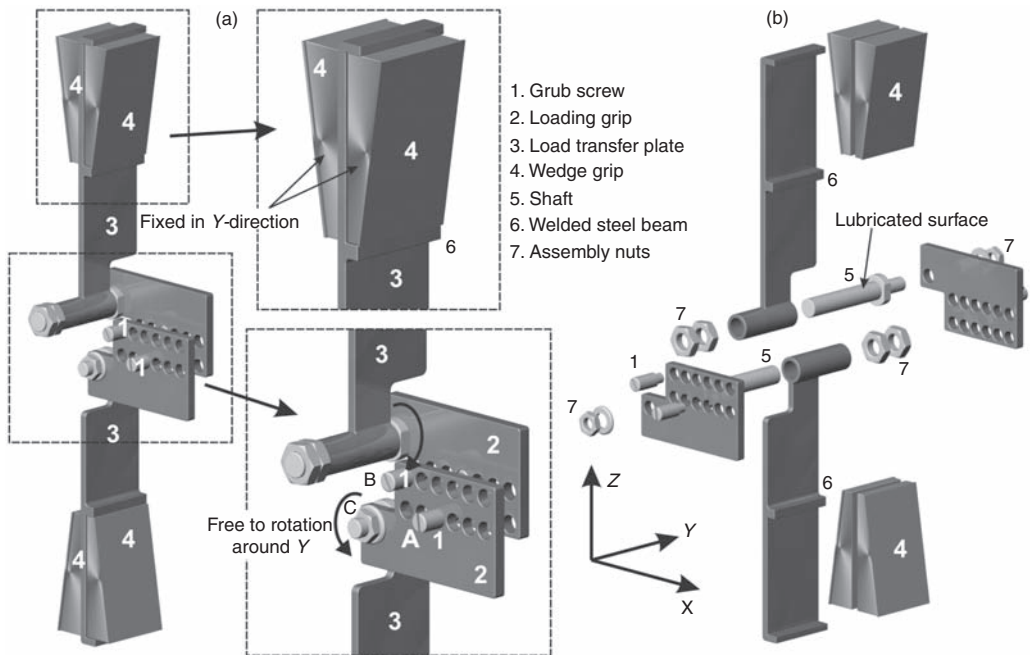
The 3D view of the experimental equipment: (a) assembled state and (b) exploded view.
